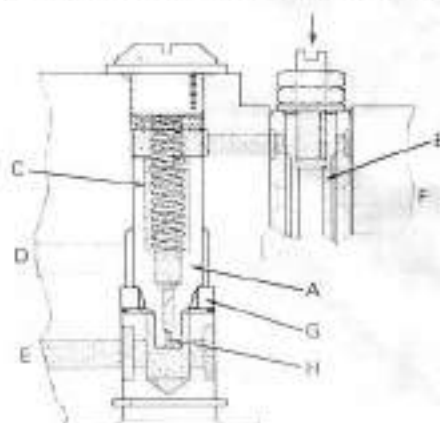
View showing pressure balanced valve operation. With spool valve (B) blocking passage from top side of valve plunger (A), pressure above valve is maintained via orifice (H) to same pressure as below valve in passage (E), thus spring (C) holds plunger on seat (G) closing outlet passage (D).
